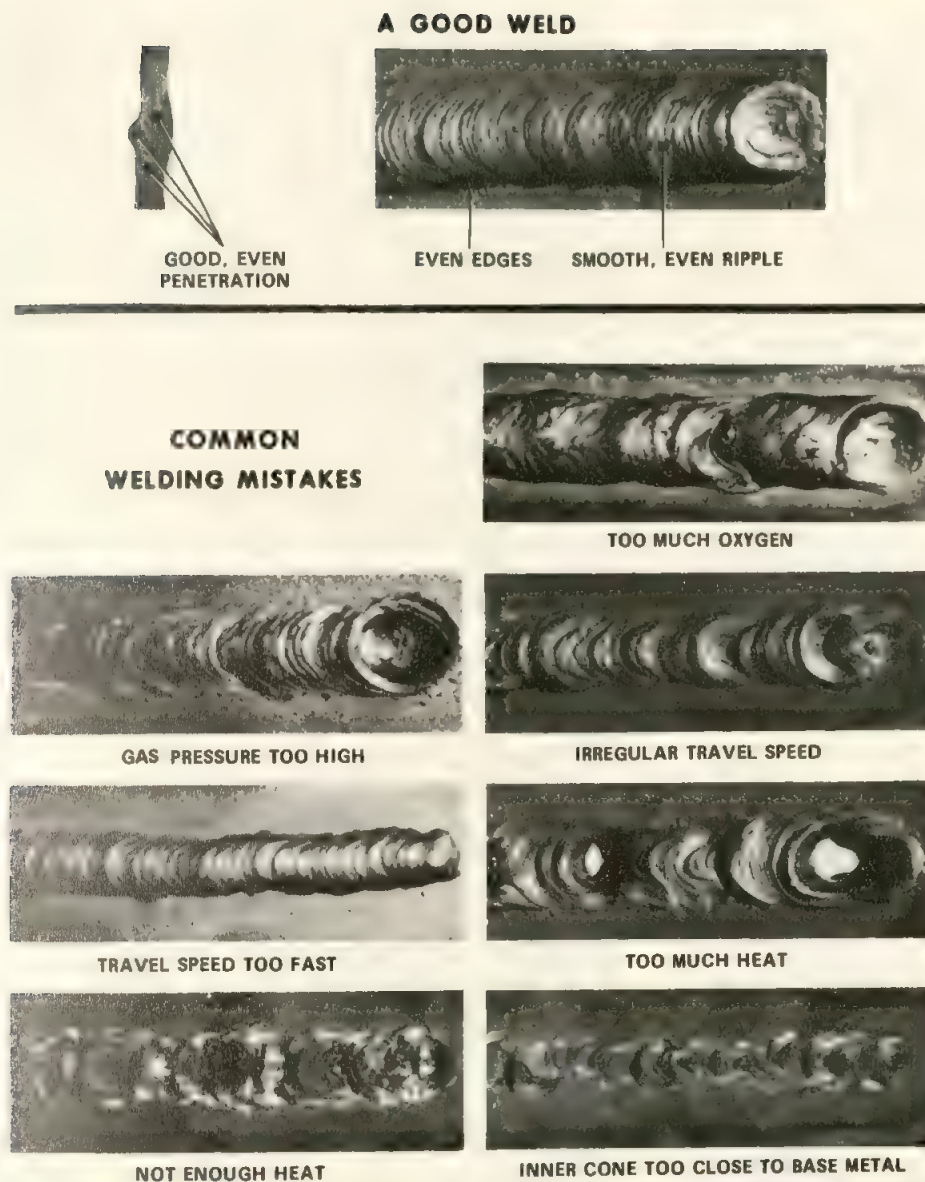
Quality of oxyacetylene welds.
